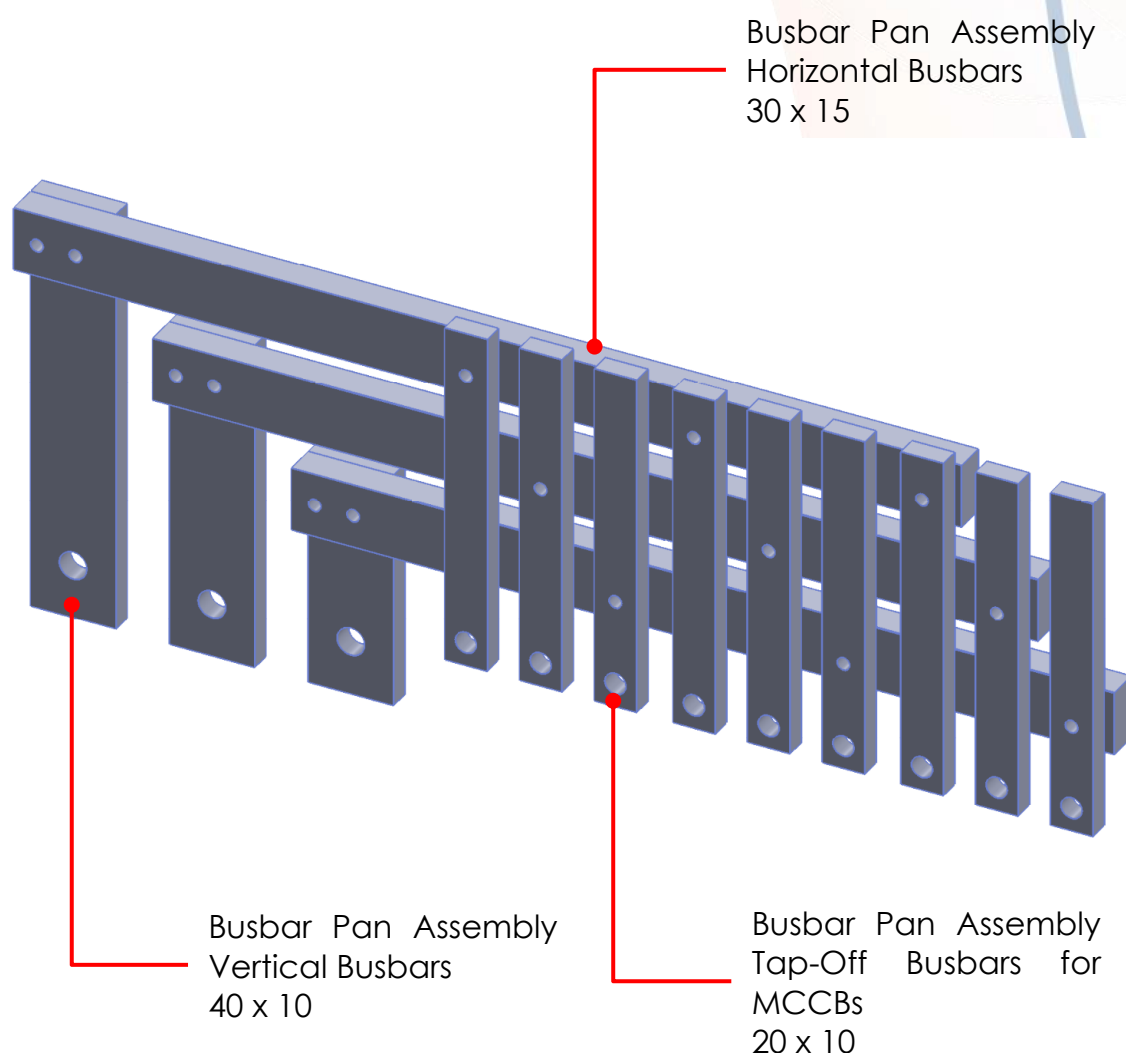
Perspective Drawing of a Busbar Pan Assembly (Insulated) for 3-way
